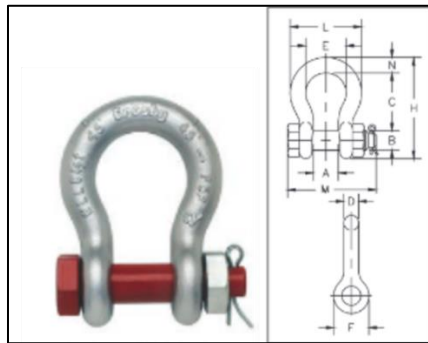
Anchor Shackle Dimensions considered for connecting the anchor to the mooring line.
